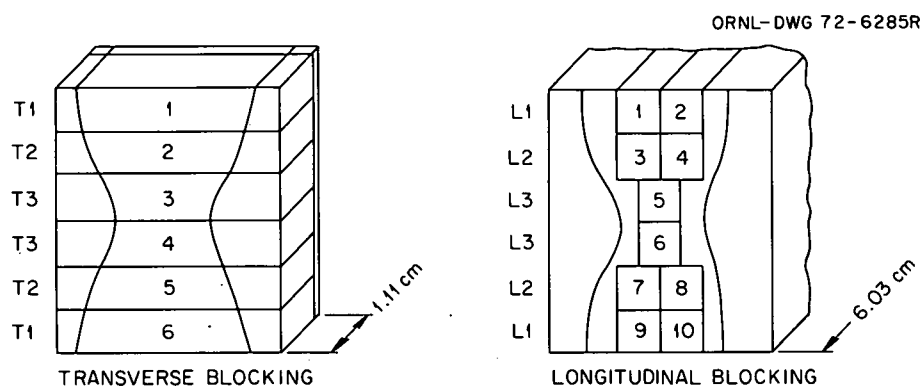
Location and Orientation of Standard Specimens in the Test Weld. Hourglass-shaped region represents weld metal.
